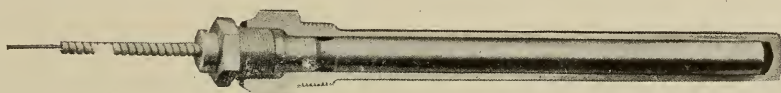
THE BRISTOL BULB WITH SOCKET.
